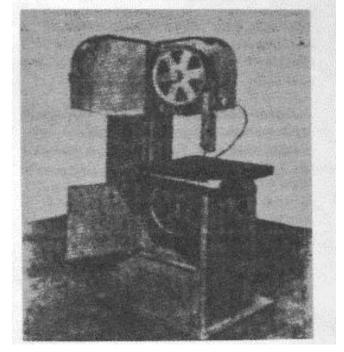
Installing a saw band. Open the doors, slip band under column guard and fit over wheels.
